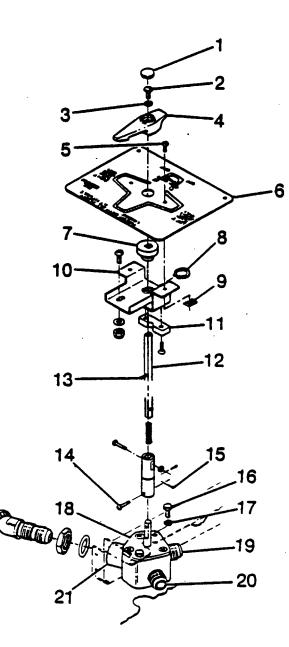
Fuel Selector Valve and Spring Compressor (Sheet 2 of 4)
